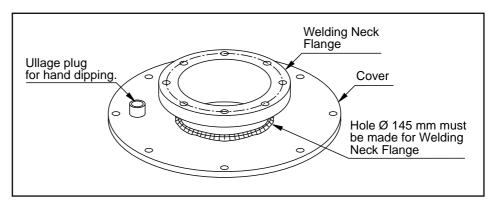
shows a welding neck flange for RTG 2930.
